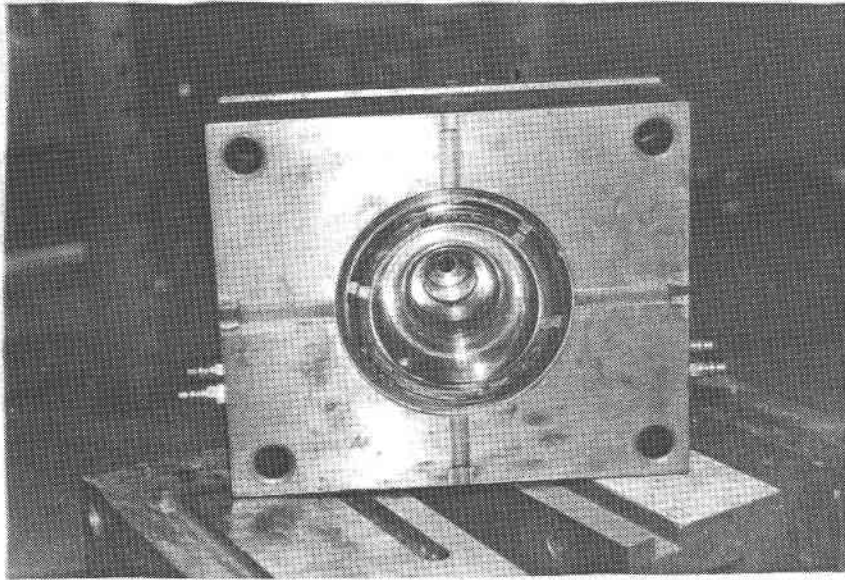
Revised Injection Molding Tool for Solid Simulated Rotor
